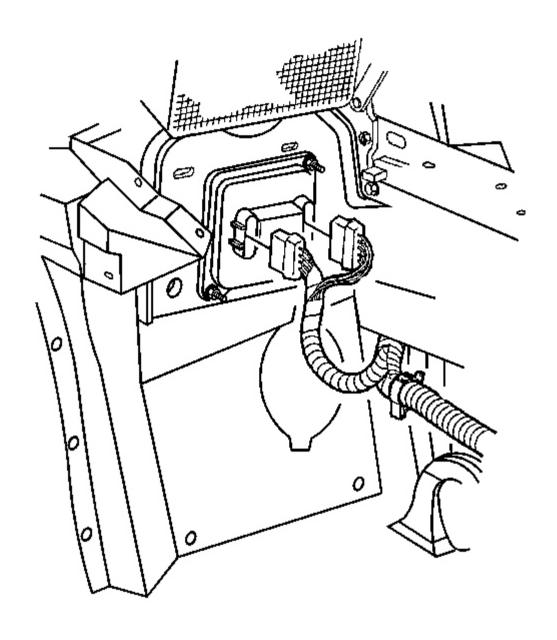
Electrical Connectors To Headlamp Control Module Courtesy of GENERAL MOTORS CORP.
